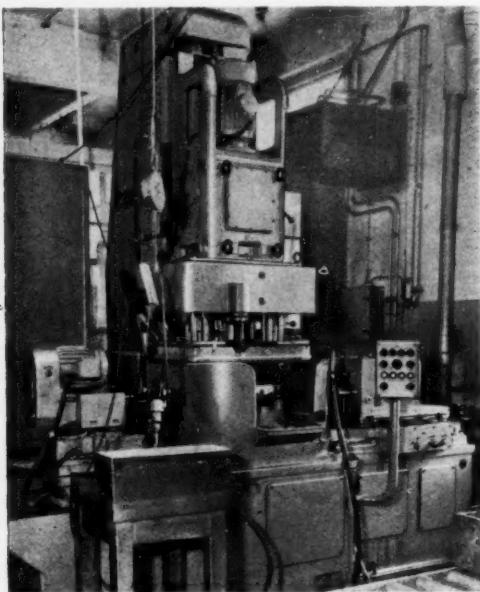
This Special-purpose Hüller Multi-spindle, Indexing-table Machine is Employed for Drilling and Reaming the Flange Holes, and Drilling and Tapping the Grease-nipple Holes
